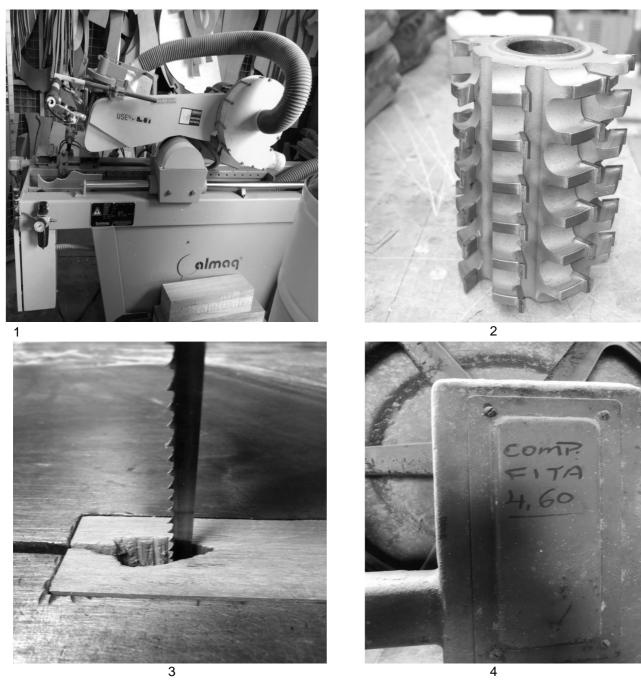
Details of the band saw (3, 4) and milling machine (1, 2).
